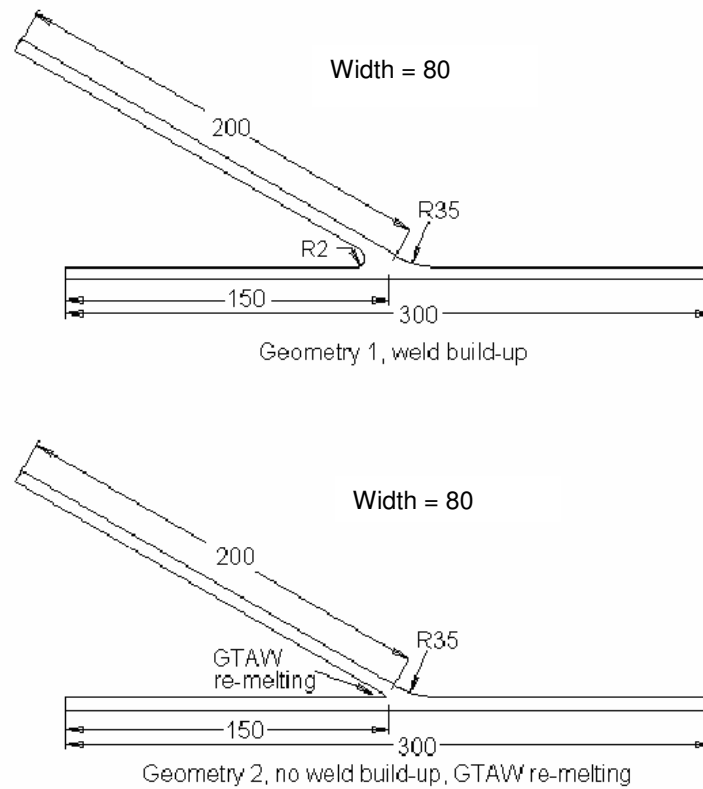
Schematic representation of the chosen weld geometries to test.
